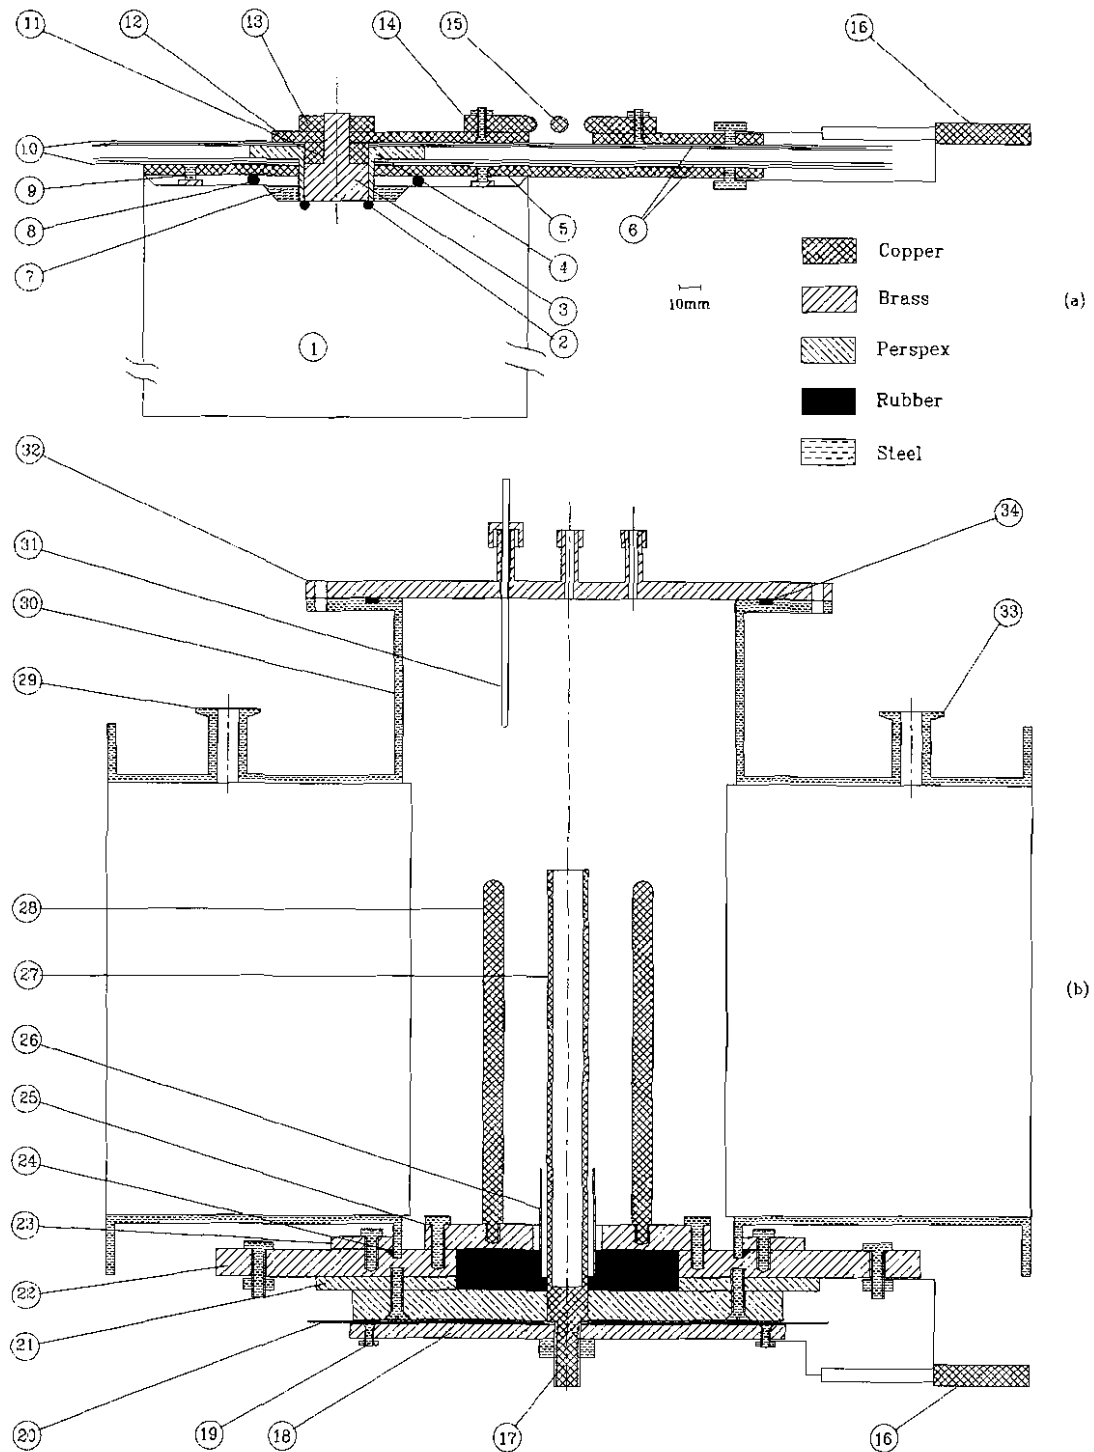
Diagram of NIE-SSC-PFF: (a) The capacitor connecting plates, the spark gap, and output coaxial cables. 1=capacitor; 2=capacitor O-ring seal; 3=nut; 4=nylon cap; 5=earth plate; 6=Mylar film; 7=oil; 8=O-ring seal; 9=earth stud; 10=polyethelene film; 11=copper ring; 12=high-voltage output plates; 13=lock nut; 14=HV electrode for swinging cascade spark gap; 15=trigger electrode; 16=output cables; (b) The plasma focus tube. 17=stud of anode; 18=anode collector plate; 19=connecting points for coaxial cables; 20=5-mil Mylar film; 21=perspex spacer; 22=cathode collector plate; 23=flange; 24=O-ring seal; 25=cathode support plates; 26=glass insulator; 27=focus anode; 28=focus cathode(6 rods); 29=outlet to diaphragm gauge and vaccum pump; 30=chamber; 31=glass jacket for magnetic probe; 32=top flange; 33=inlet for test gas; 34=O-ring.
